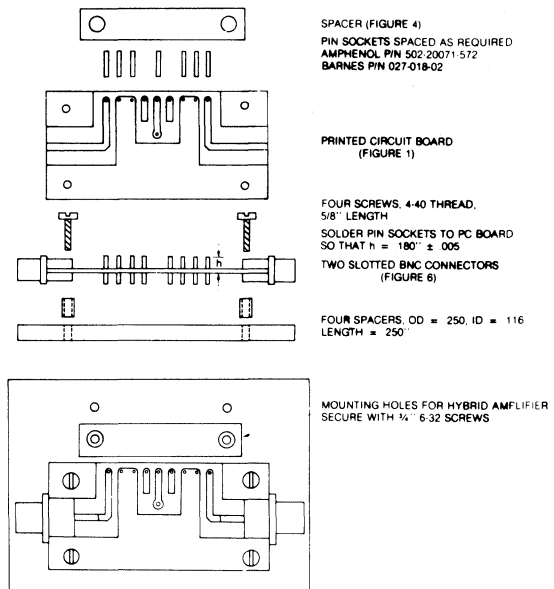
Text Fixture Assembly for Hybrid Amplifiers in Low Profile Package (Case 714G-01)
